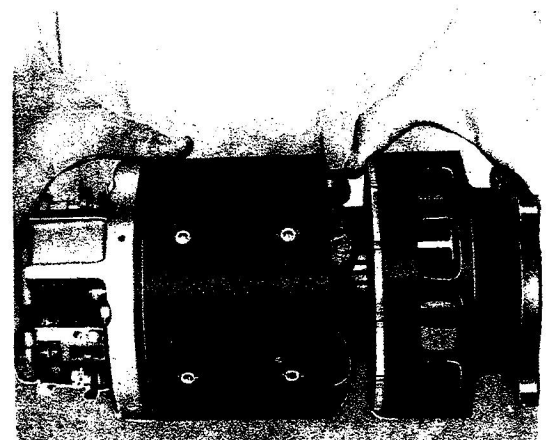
Separation of Armature Assembly and Back Head, as a Unit, From Front Head and Yoke Assemblies
